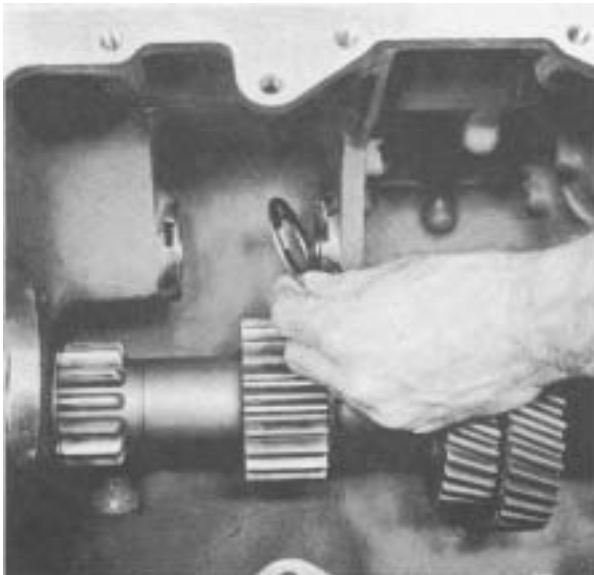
Use heavy grease on reverse idler thrust washers to hold in place.
